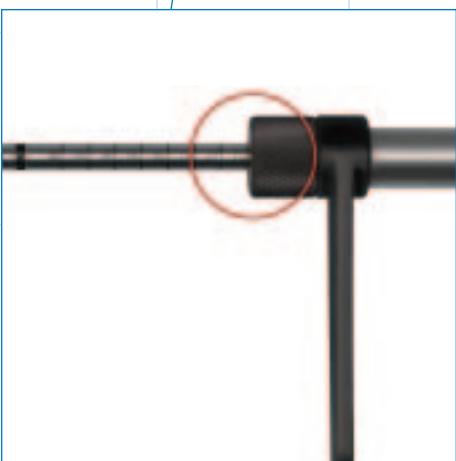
Read the calibration on the drill bit that lines up with the drill sleeve to determine the screw length (Fig. 25).
